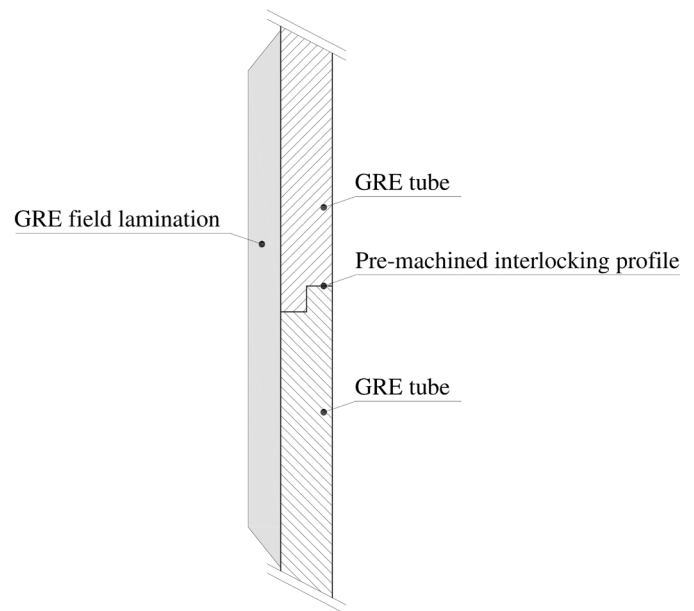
Detail of the butt joint between two GRE cylinder barrel tubes.
